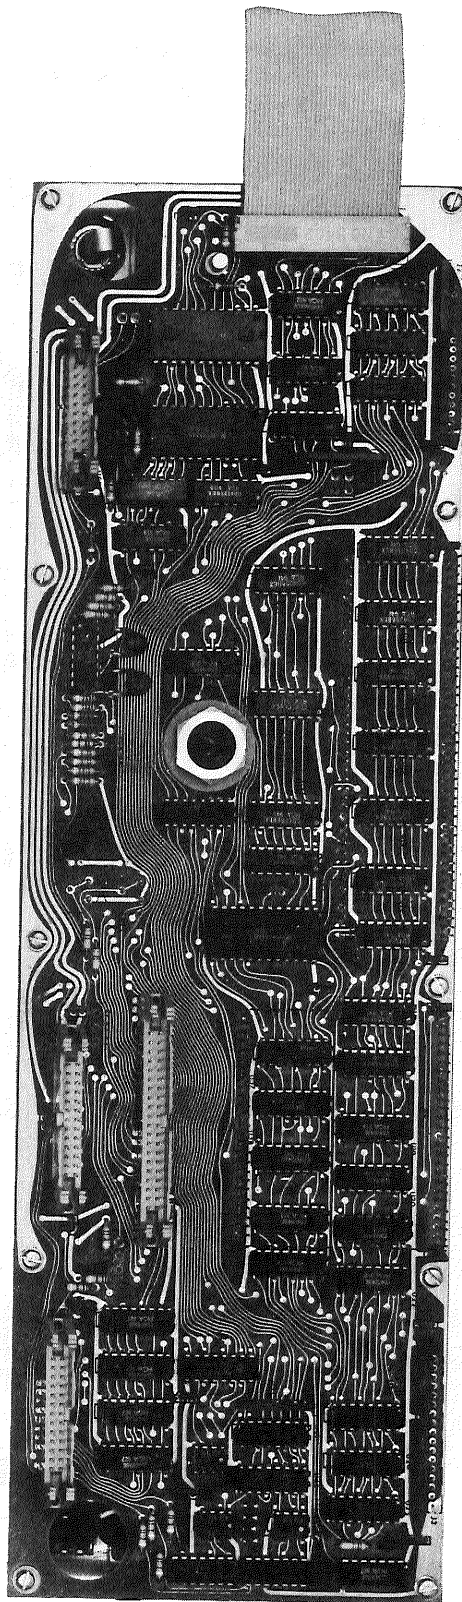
A. Receiver Control Circuit Card A9 Assembly
